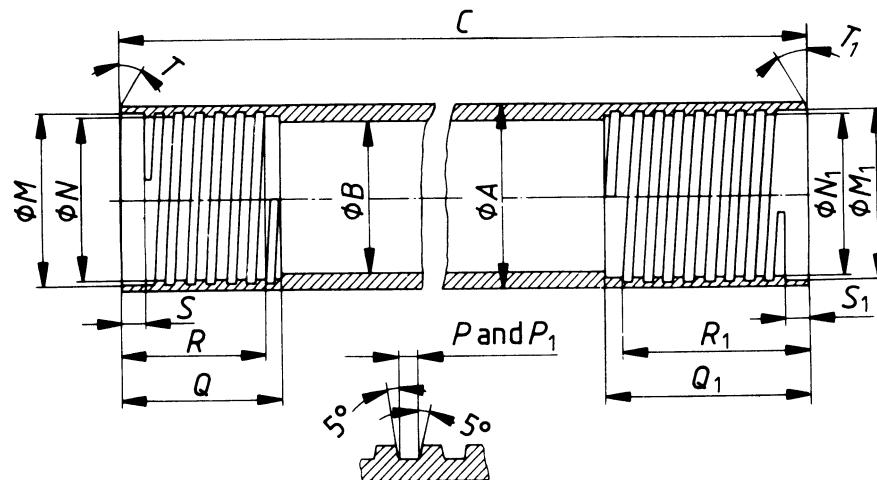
“WM” design double-tube core barrel — Outer tube (see Table 40)
